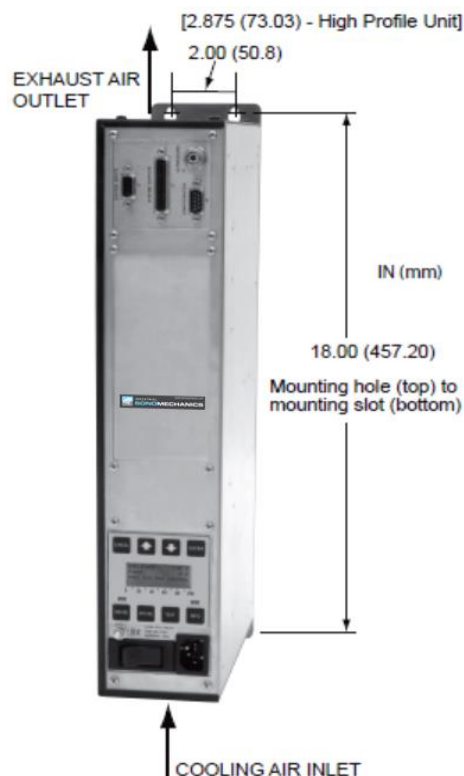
1. Vertical Panel Mount Chassis Placement (Low profile unit shown with optional panel mounting plate.)
